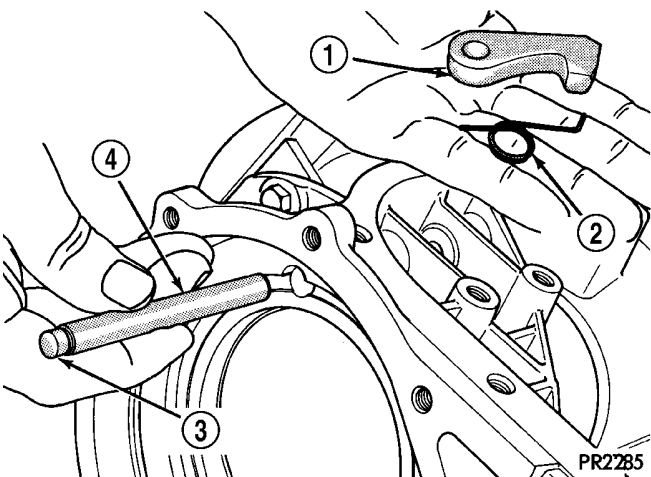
Parking Pawl, Return Spring, and Pivot Shaft
